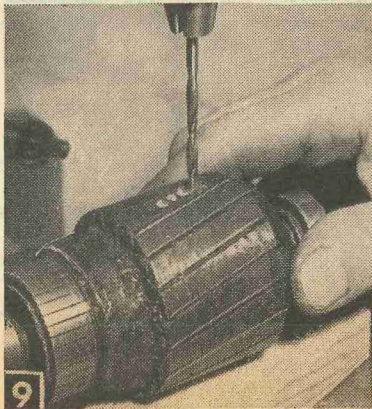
Sometimes you can balance this type of rotor by drilling metal out of the core on the heavy side. Do not drill deep enough to damage the structure.
